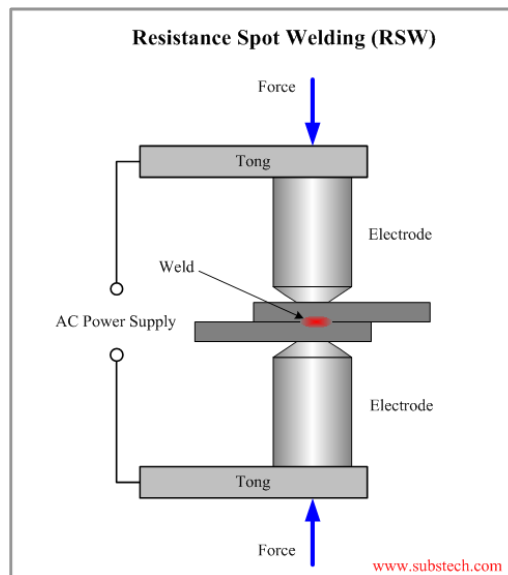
Resistance Spot Welding system (Dr. D. Kopeliovich n.d.).
